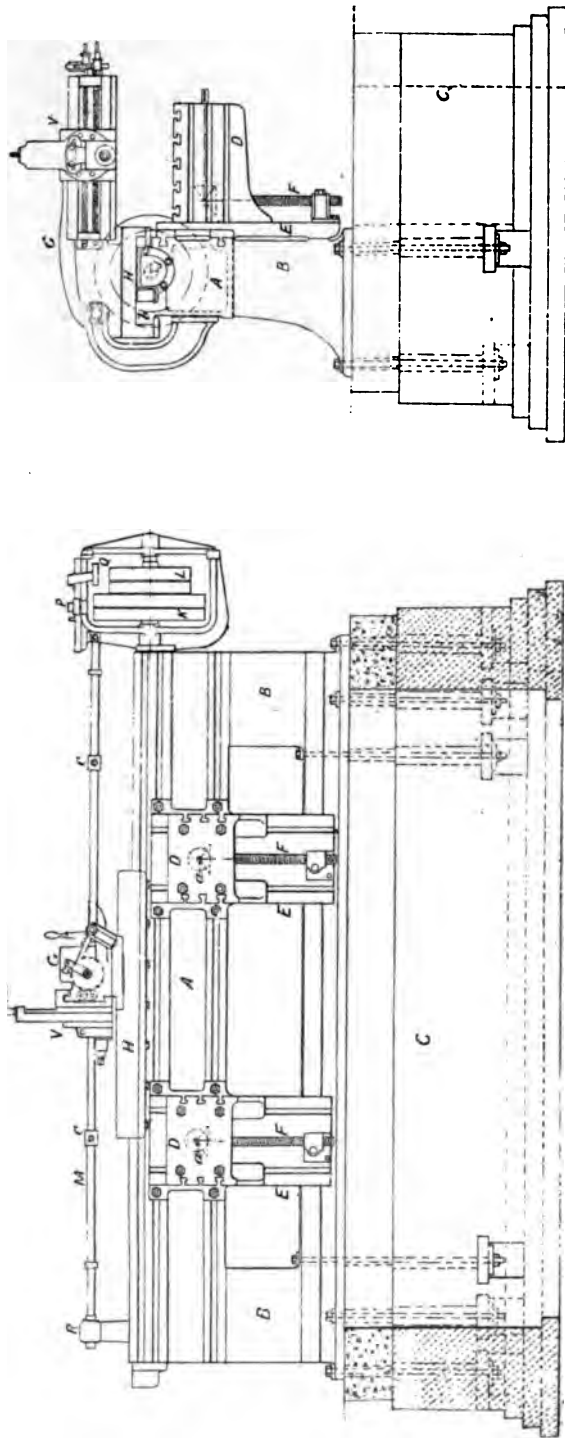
Side Planing Machine. Front and End Elevation. (Geo. Richards & Co., Ltd.)
